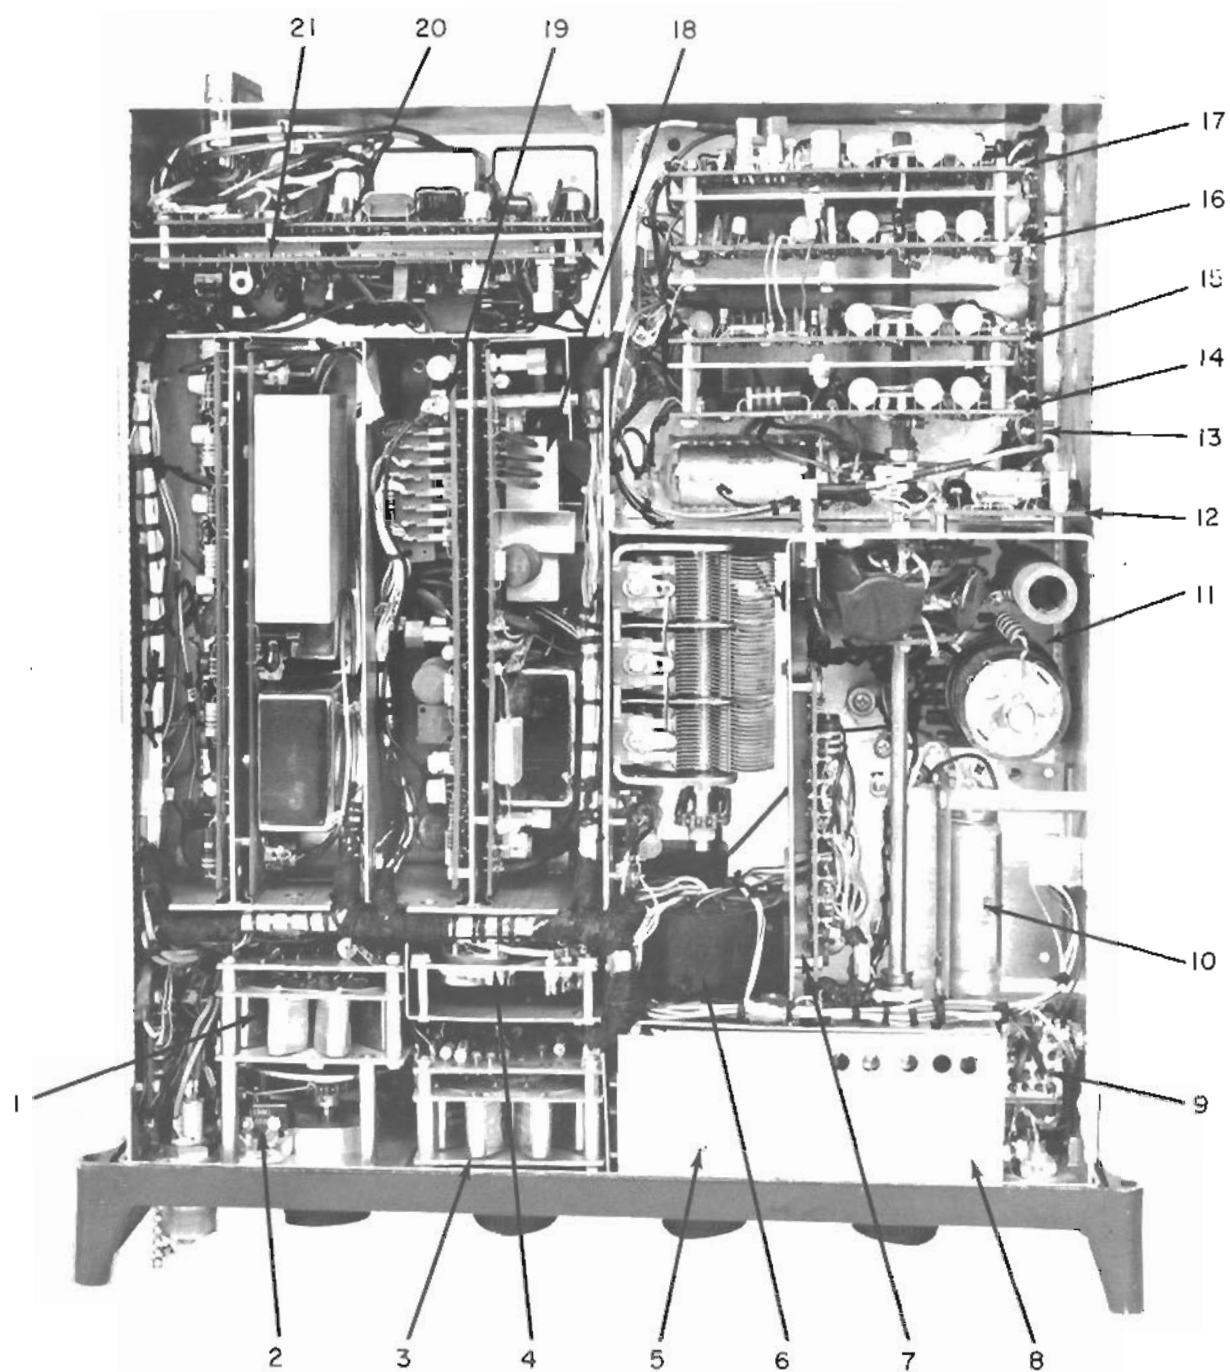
ASSEMBLY IDENTIFICATION, BOTTOM OF TRANSCEIVER CHASSIS
